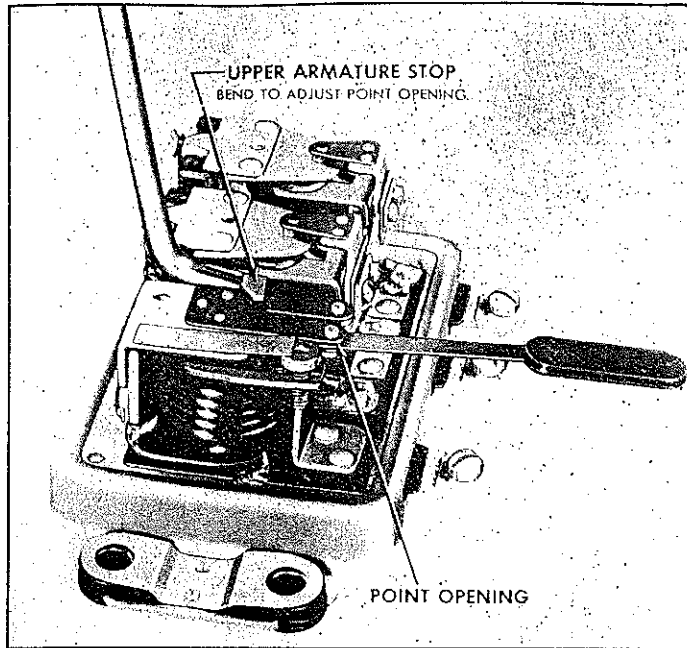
Adjusting cutout relay point opening on Delco-Remy single core regulators with screw adjustment
